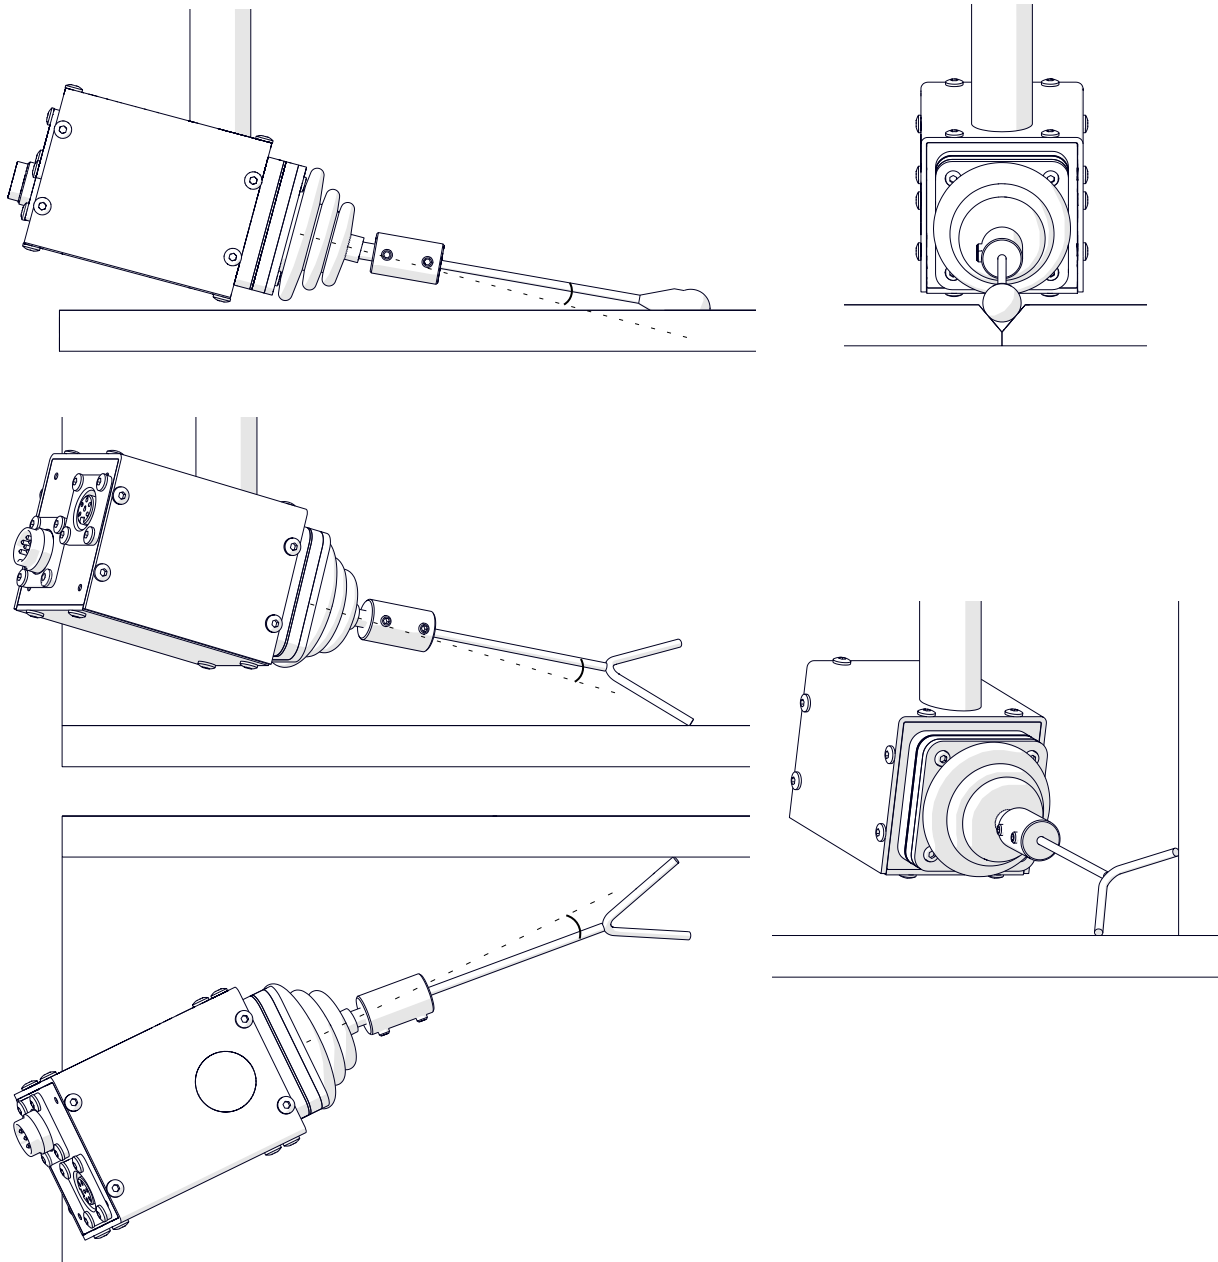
Setting the tracking sensor correctly in the welding seam
